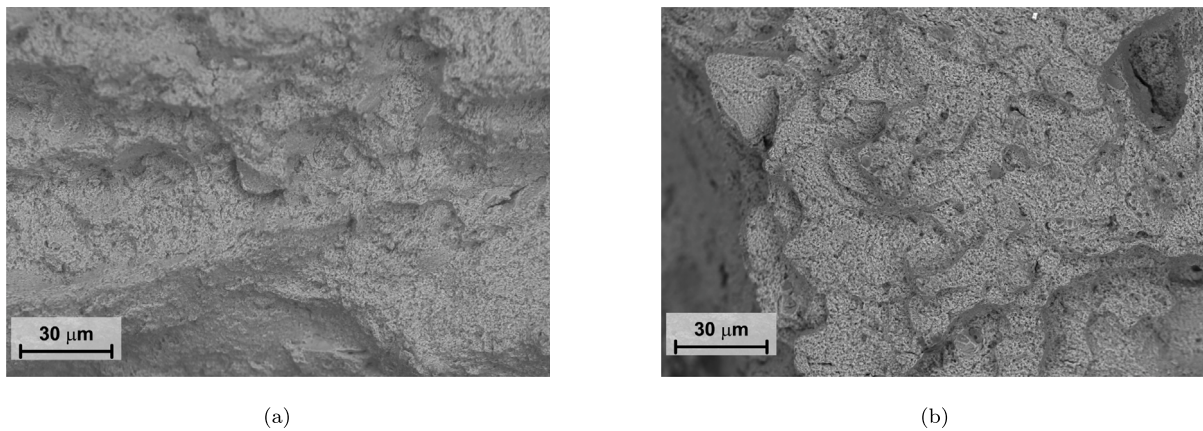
Fracture surfaces of (a) V-Alloy and (b) Re-Alloy. The presence of microvoids highlights the ductile fracture for both alloys.
